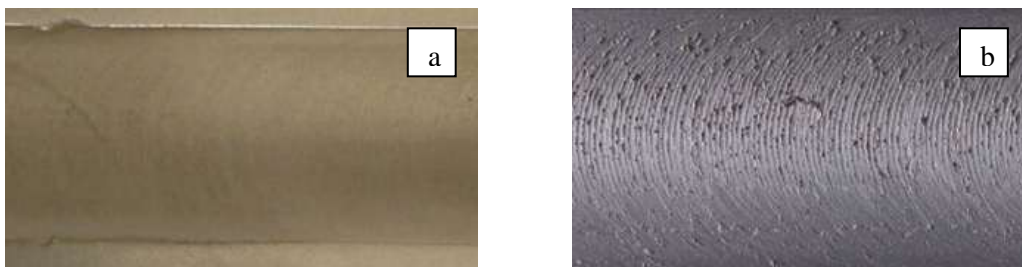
Crown view of (a) Cold weld (b) Hot weld
